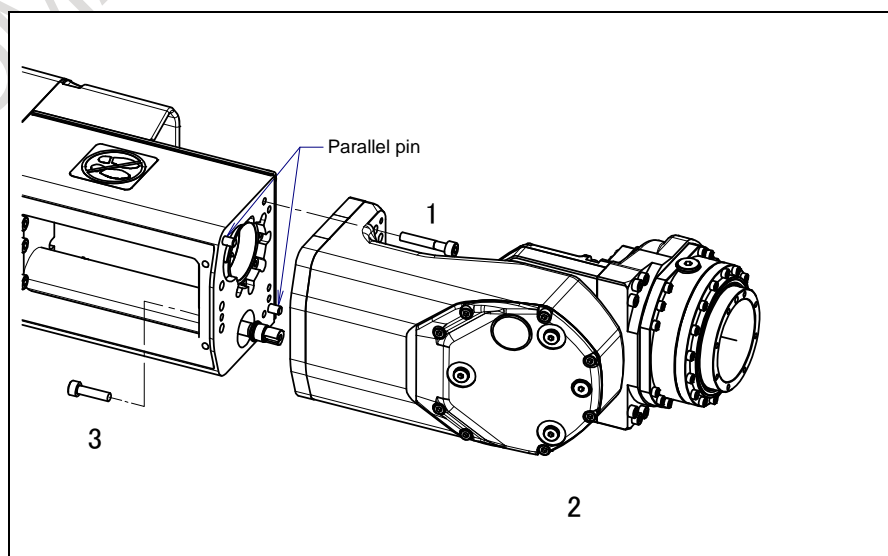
(a) Replacing the J5/J6-axis gearbox
